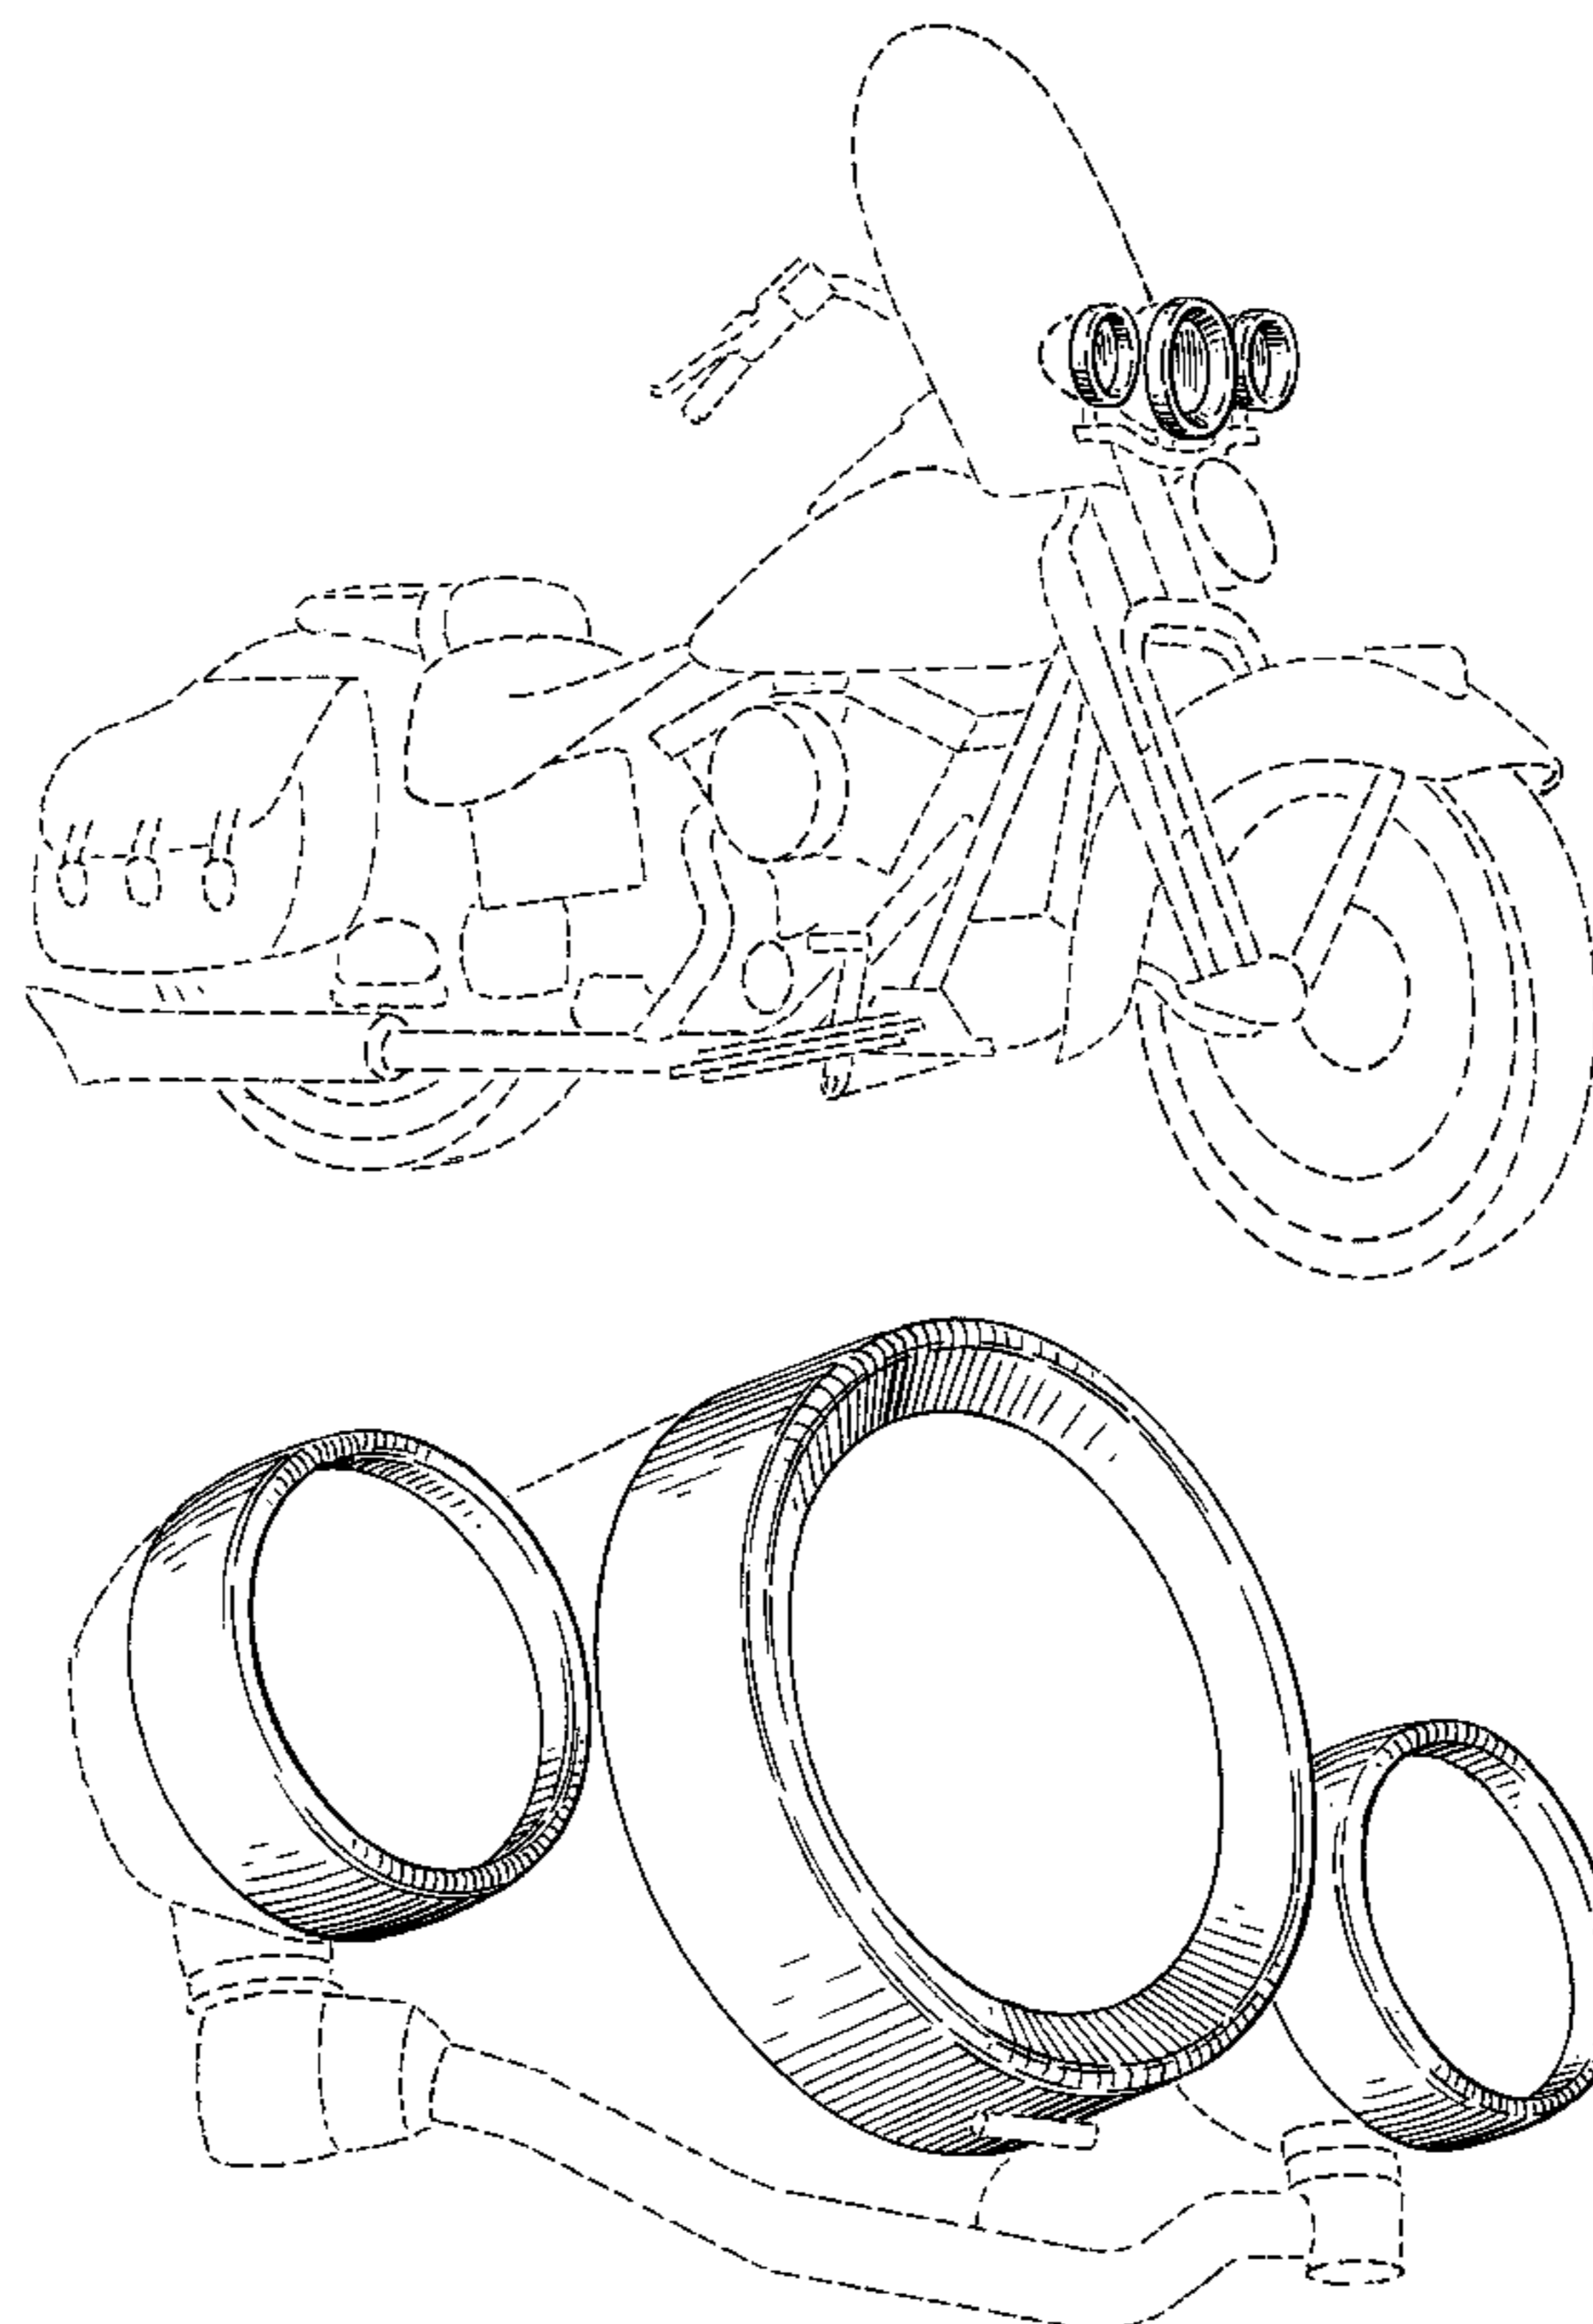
is an enlarged side view of the design shown in FIG. 1.
